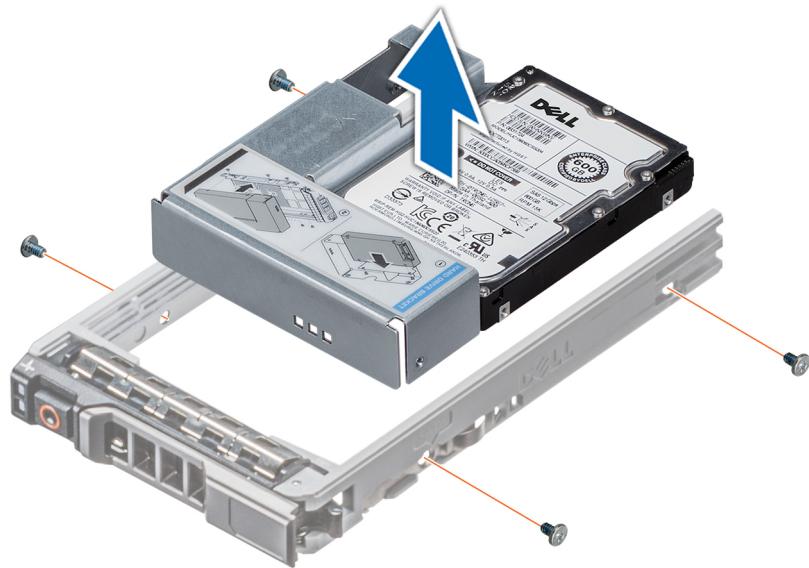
Removing a 3.5-inch drive adapter from a 3.5-inch drive carrier
